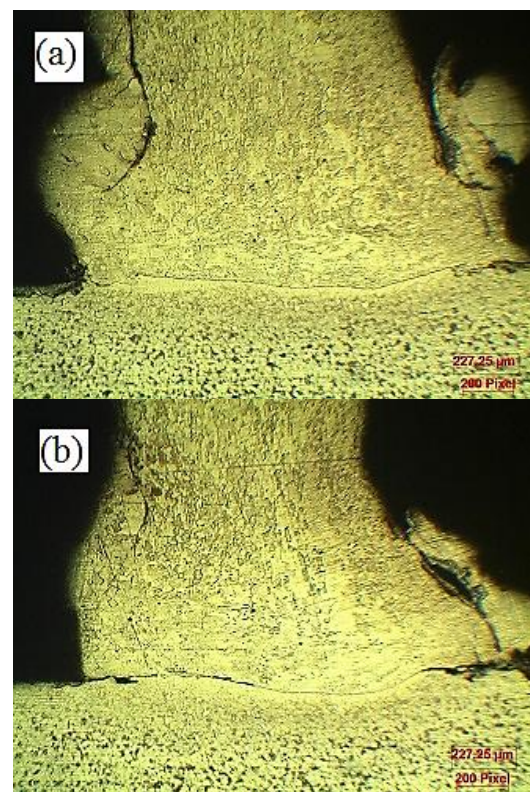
The microstructure of AISI 409 FSS to T22 boiler tube (a) Accepted sample: 100% weld bond (b) Rejected sample: 84% weld bond.
